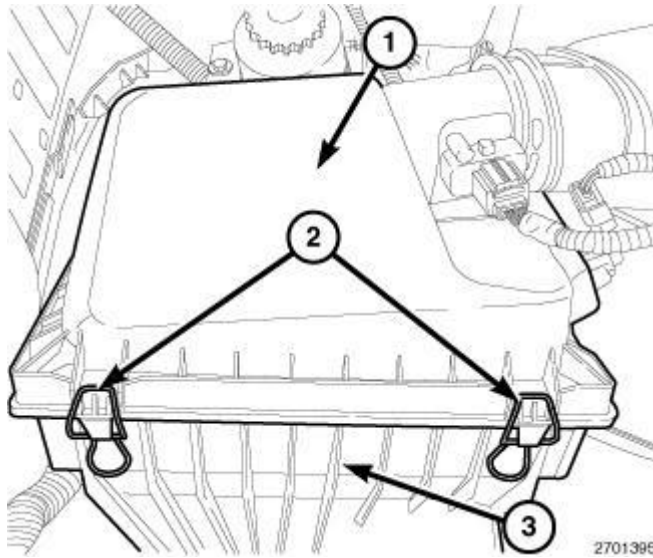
IDENTIFYING AIR CLEANER HOUSING & CLIPS
